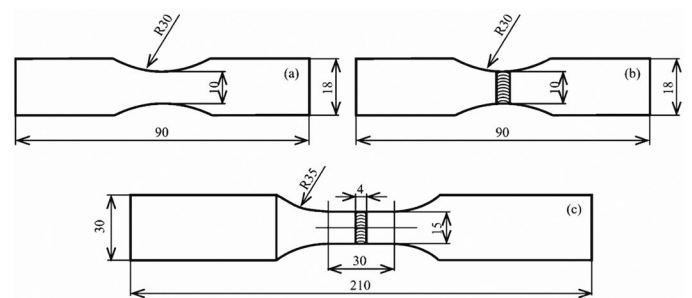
The samples prepared according to DIN 50142 and ASTM E8: 2016; a) Fatigue test sample of the base material, b) Fatigue test sample of the FSW, c) tensile test sample of the FSW
